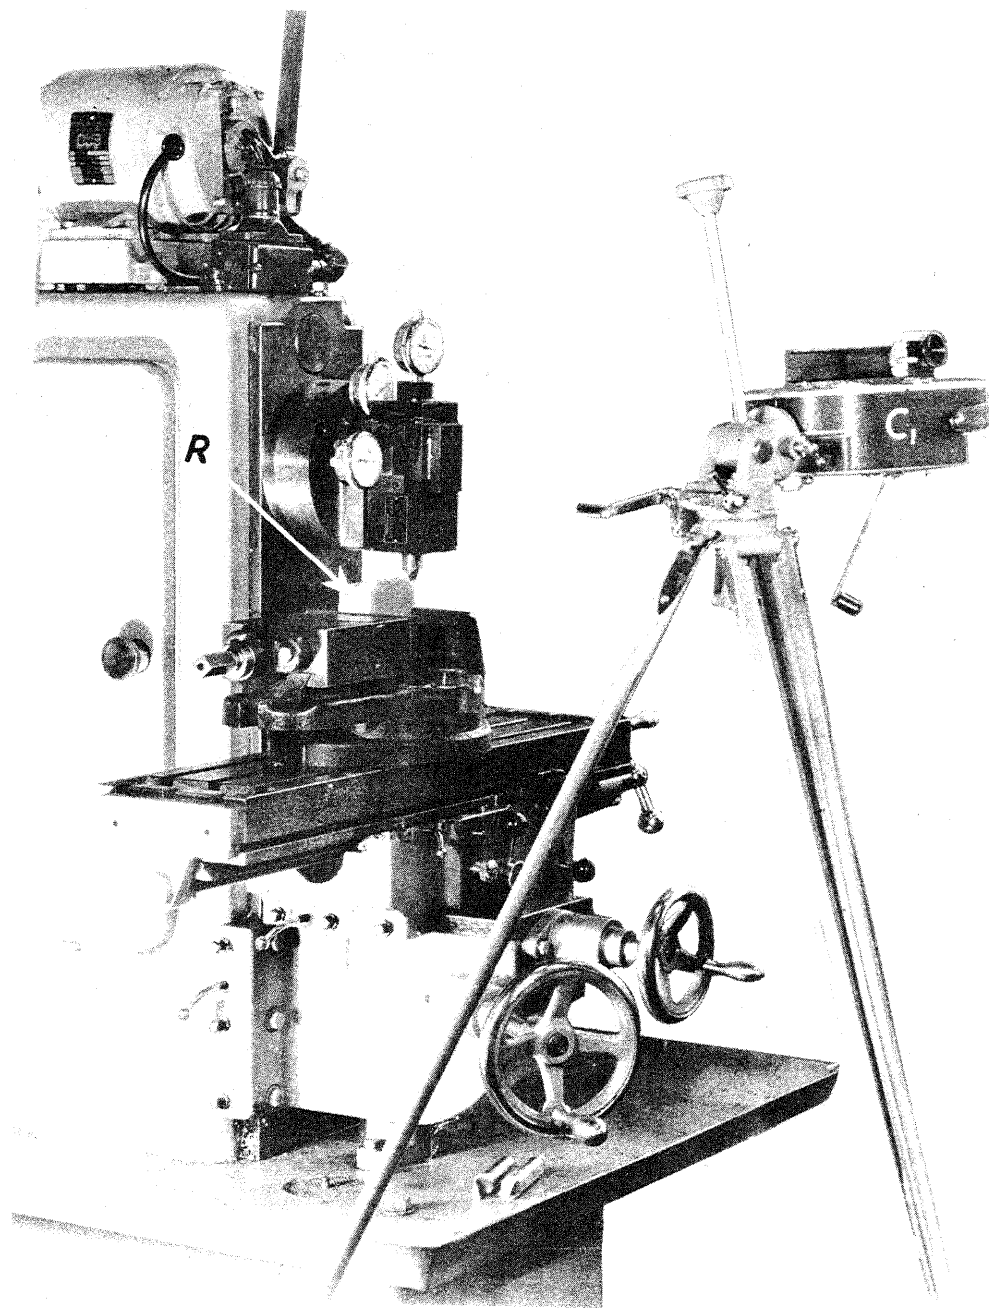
LATHE DYNAMOMETER USED FOR TESTS ON PLANING ROCK
